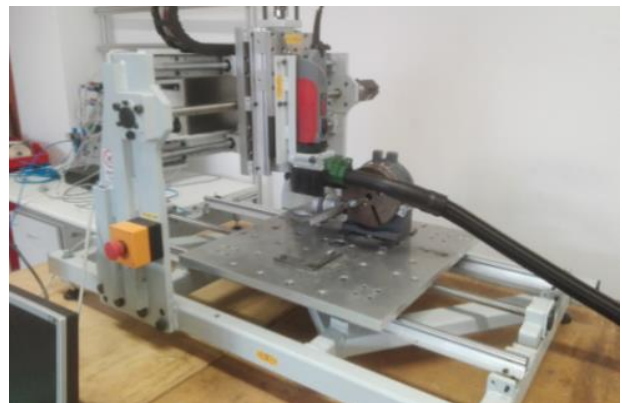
The applied CNC machine, detailed parameters are in [8]
